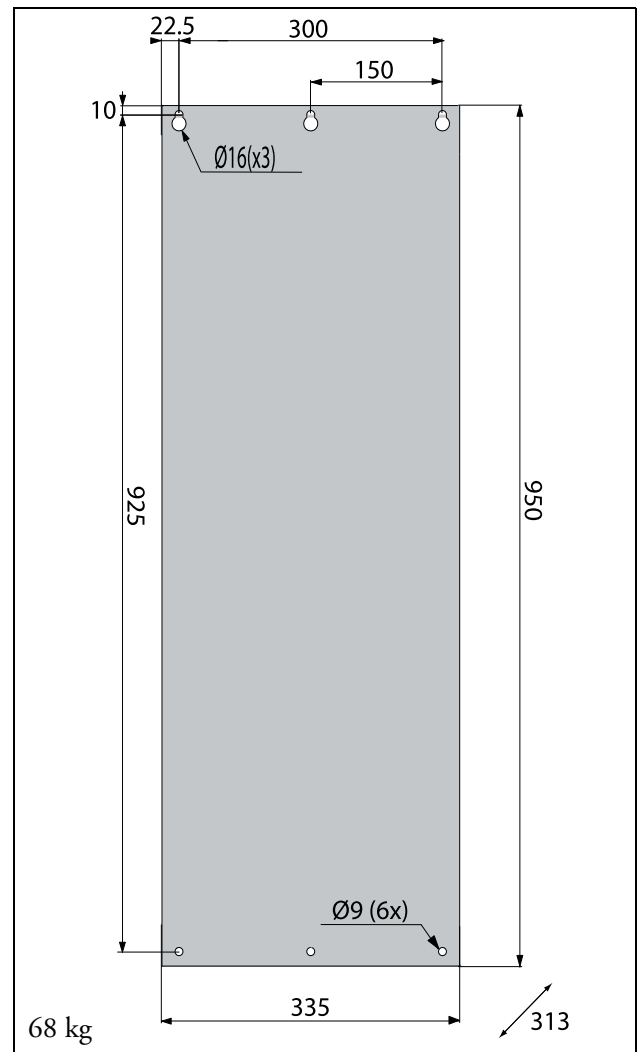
Fig. VII Dimensions VFX/FDU model 48-205 to 48-244 (Size F2), backside view.
